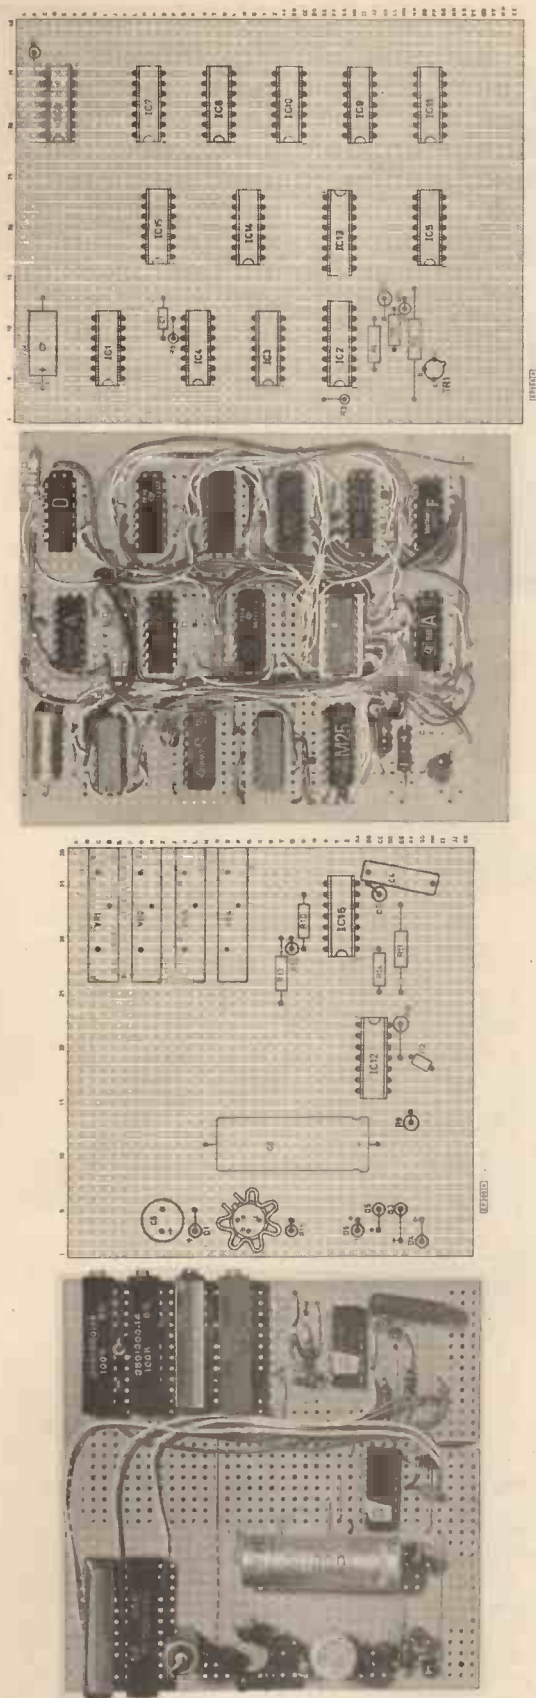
Component layout for prototype boards. Since the unit is primarily a piece of experimenters test gear which will readily translate for stripboard assembly no cutting or interwiring details are given just a guide for component placement
